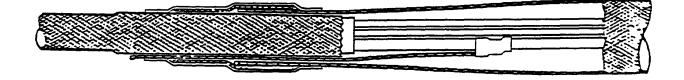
Termination of Gross-Shielded Harness (Sheet 3)
